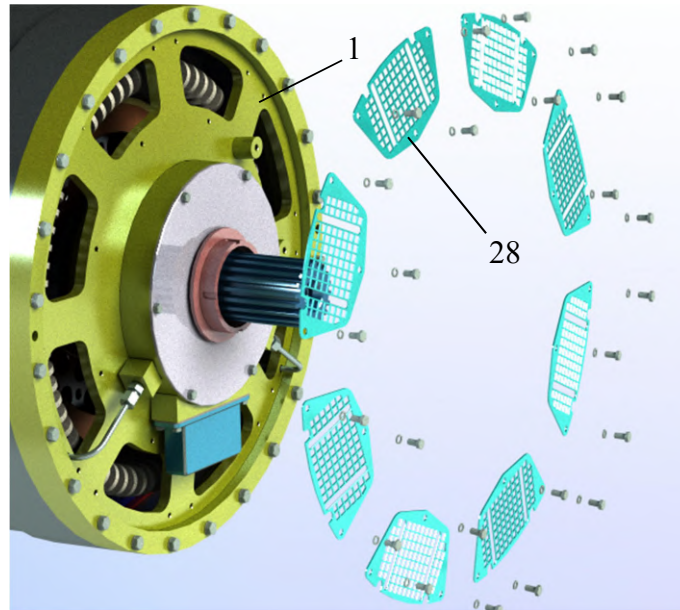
Dismantling of Ventilation Grilles from the Bearing Shield (Drive Side)
